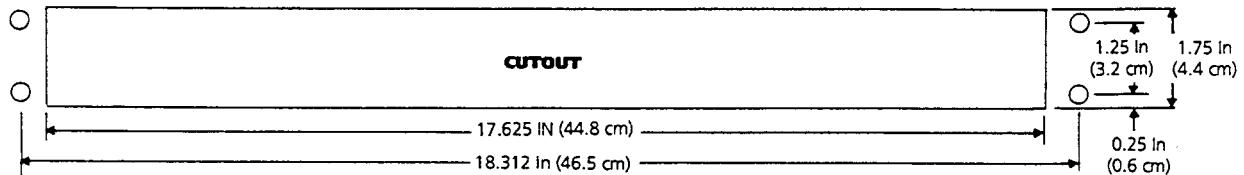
Mounting dimensions, panel-mount chassis for RFL 9720 Digital Pilot Wire Interface
